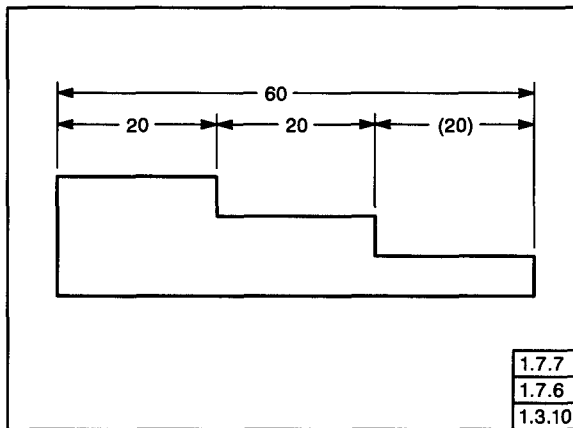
INTERMEDIATE REFERENCE DIMENSION
